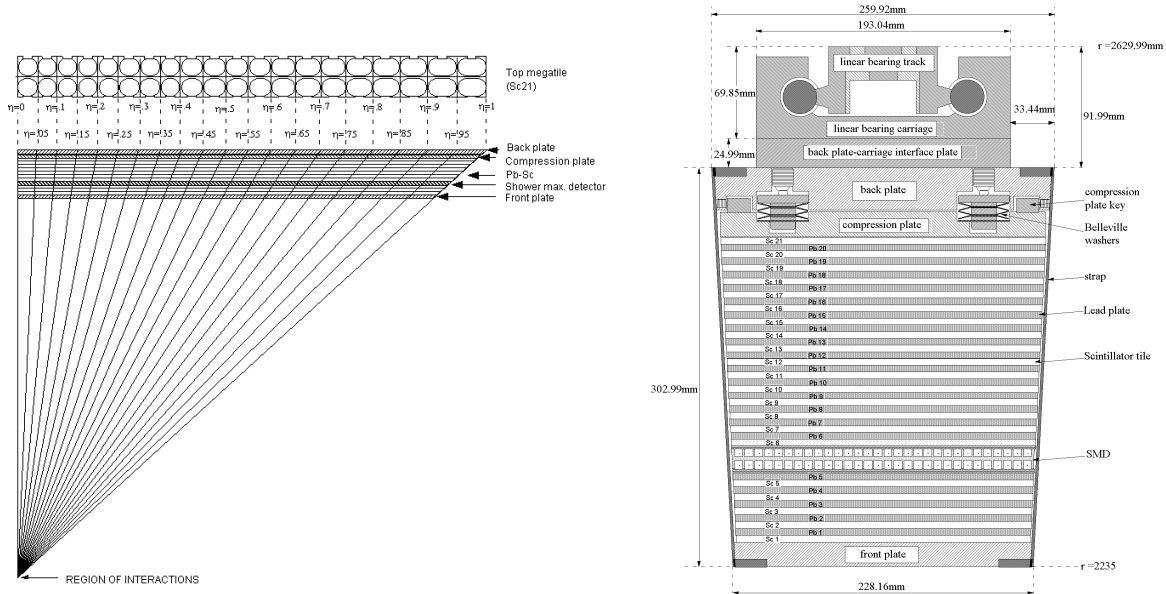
A side view of a BEMC module, showing projective tower geometry (left), and dimensions and mechanical structure of the lead-scintillator plates, compression plate, and rail mounting (right). Figure taken from [118].
